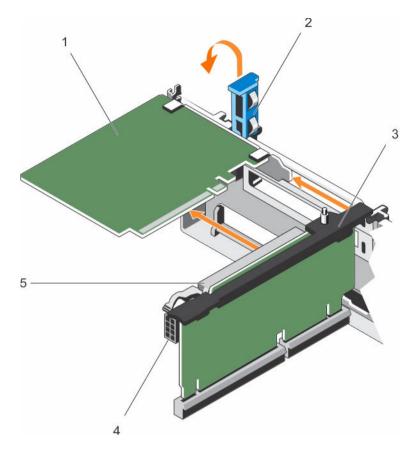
Removing an expansion card from expansion card riser 2 or 3
